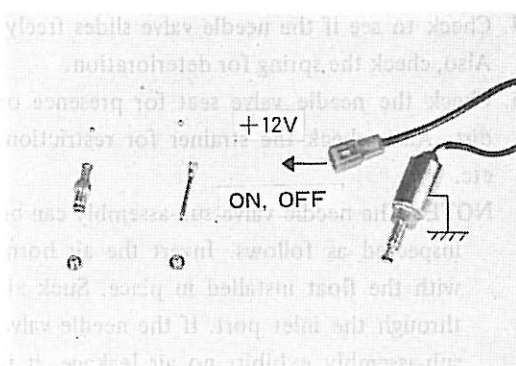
Checking Jets, Steel Ball and Solenoid Valve
